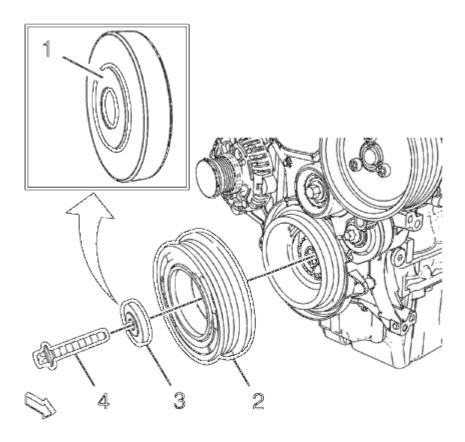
Crankshaft Balancer, Washer And Bolt Courtesy of GENERAL MOTORS COMPANY
